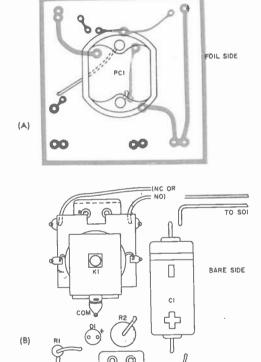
Here's the component layout. Photocell PC1 is mounted on the foil side of the circuit board as shown in (A). All of the other parts are mounted on the bare side of the board as shown in (B).
